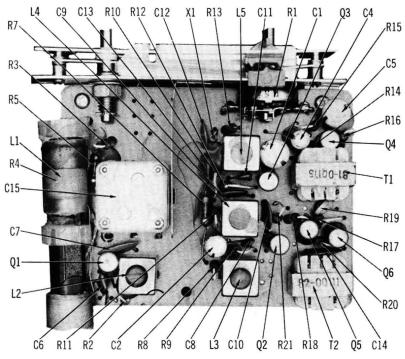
The radio chassis in Fig. 1-6 with the components identified.
